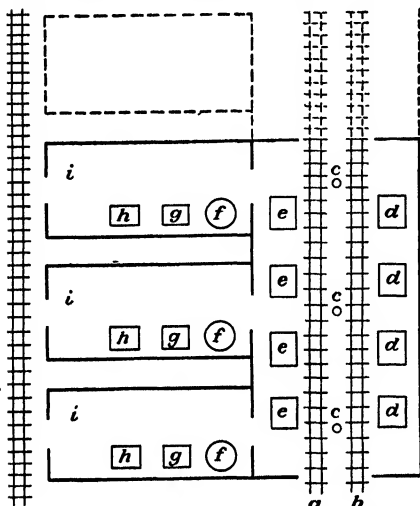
Plan of a well-designed slate mill. *a*, *b*, mill-car tracks; *c*, derricks; *d*, saws; *e*, planers; *f*, rubbing beds; *g*, *h*, Carborundum machines, polishing machines; *i*, space for storage and crating.
